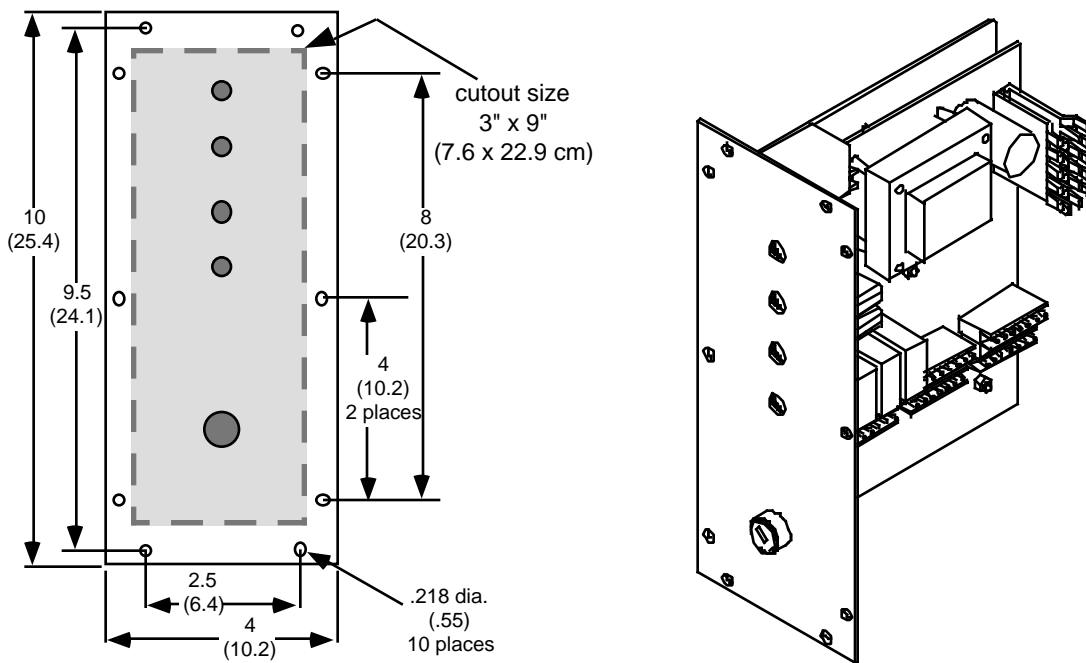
Detector 3 Panel Mount Control dimensions (left) and illustration (right)
